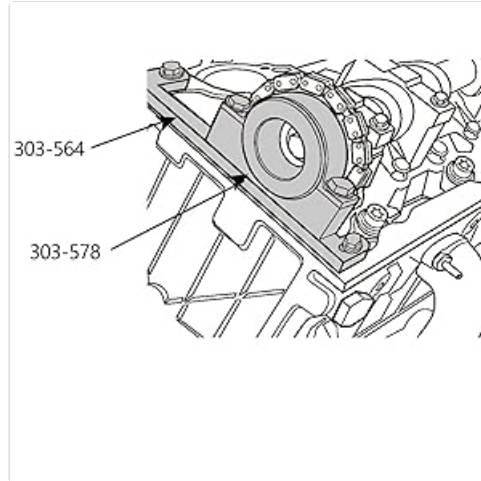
The 303-564 and 303-578 tools correctly positioned on the camshaft gear.
